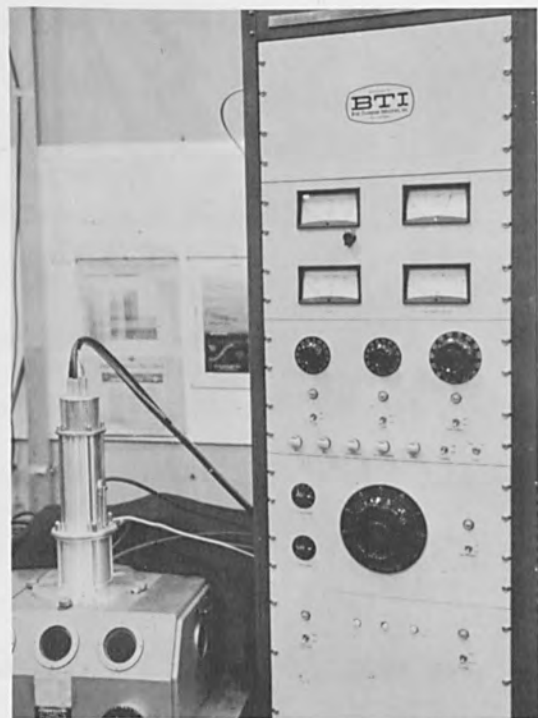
Low Voltage Electron Beam Welding Equipment.
